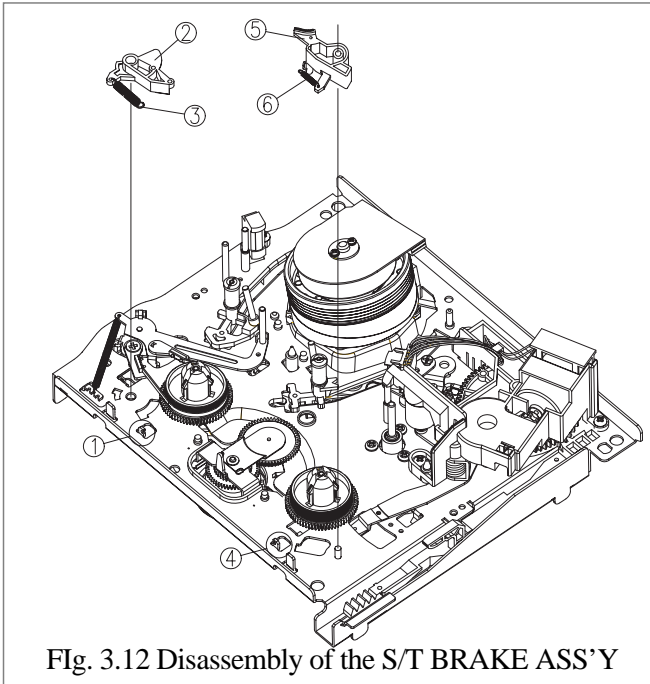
Disassembly of the S/T BRAKE ASS'Y
